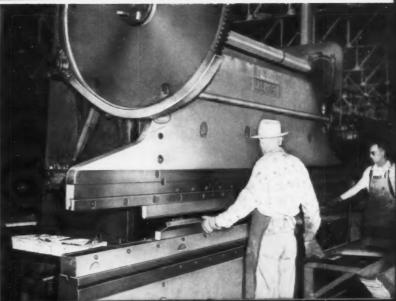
Press brake which is used to form structural stiffeners that are subsequently welded to the Nike containers. Typical parts formed on this machine are seen at lower right.
